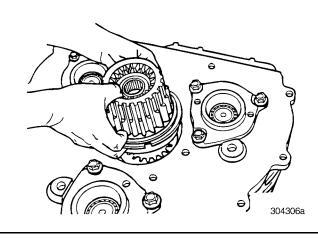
Installing Rear Compound Main Drive Gear and Bearing Assembly
